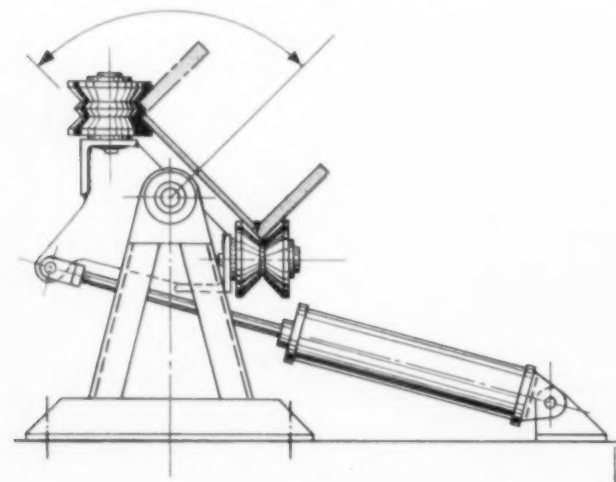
, above, fixture used to weld fillet A, Sta. 2. Fig. 6, at left, tilting fixture used at Sta. 3.
